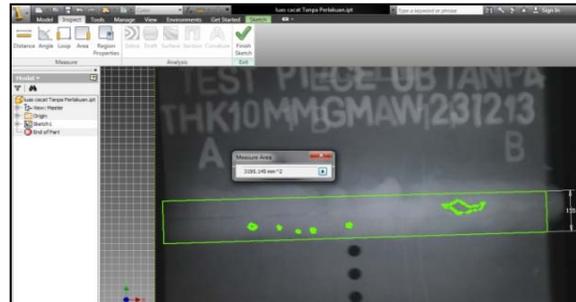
The processing of the weld defects area using Autodesk Inventor 2012.
